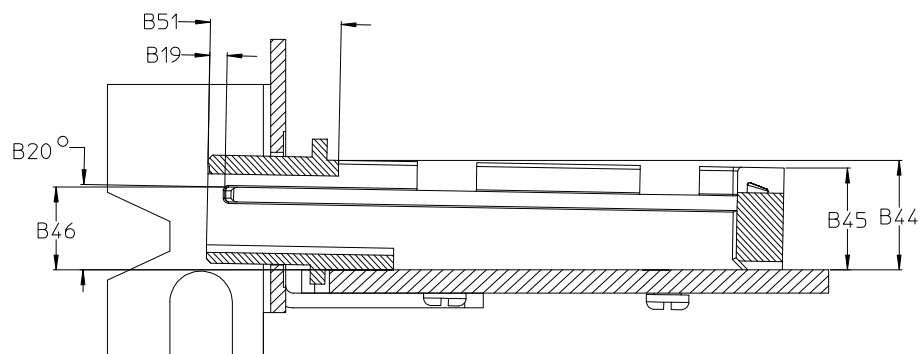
x8 (1°) EMI Guide Housing Assembly Section Side View
